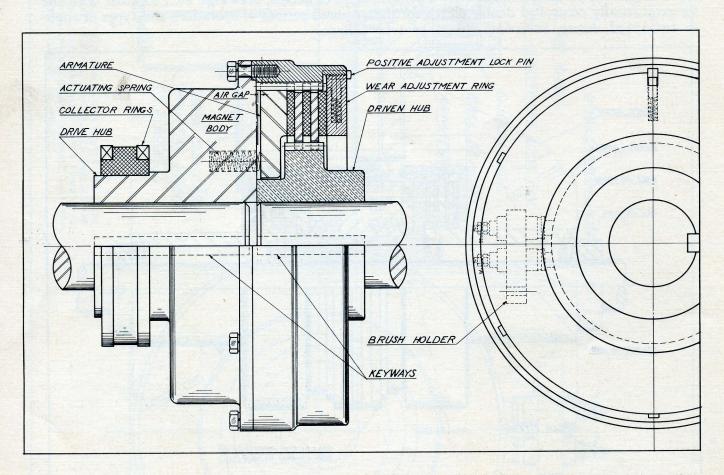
A. Detailed drawing of a typical "Stearns High Duty" Style "SCE" Spring Closed Magnetic Clutch.
